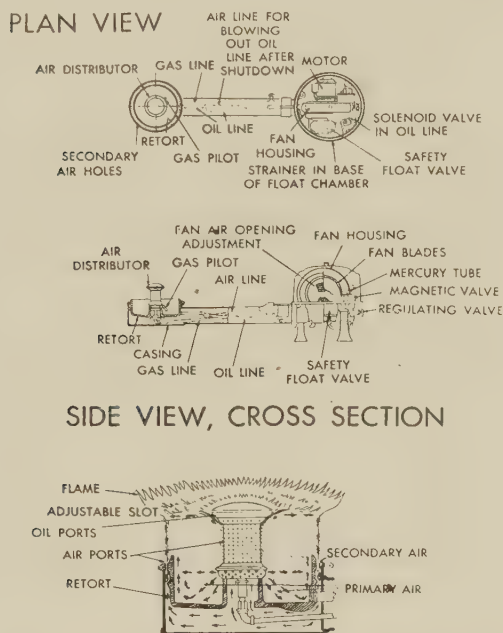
POT-TYPE MECHANICAL-DRAFT BURNER
